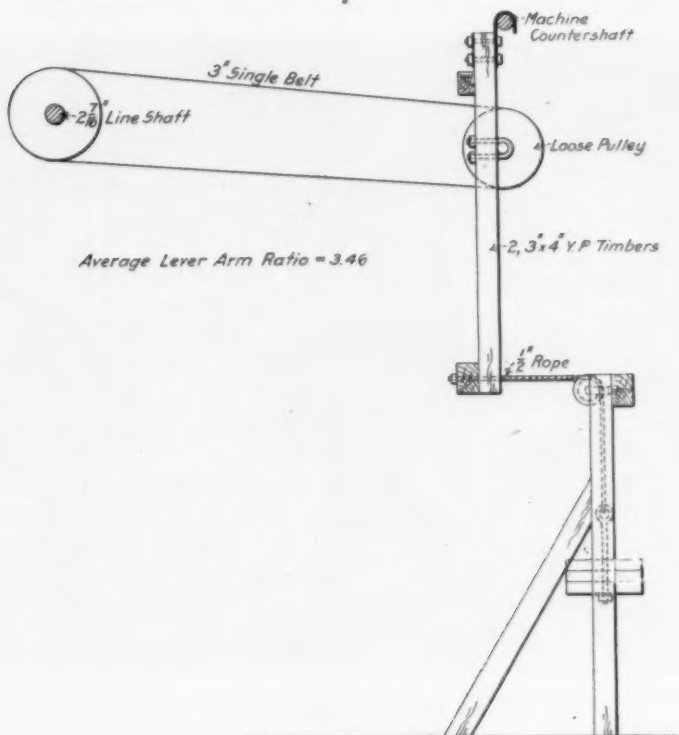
ARRANGEMENT OF COUNTERSHAFT FRAMES USED DURING COMPARATIVE TESTS OF BALL AND RING-OILING BEARINGS
